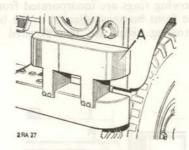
Bumperettes, front illustrated A—Front bumperette
